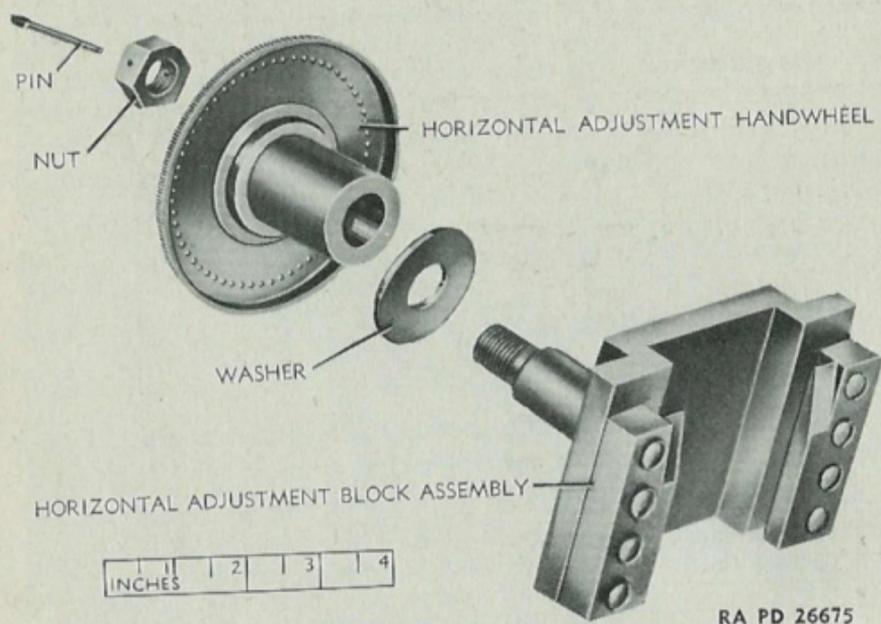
Horizontal Adjustment Block Group Parts for M33 and M45 Mounts
